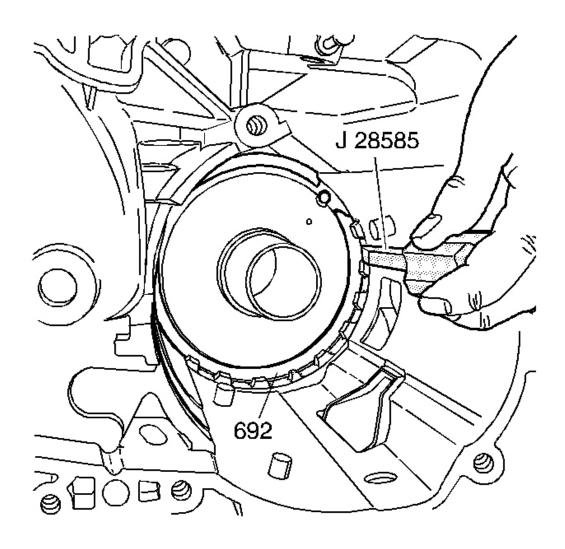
Using J 28585 To Install The Snap Ring Into The Case Courtesy of GENERAL MOTORS CORP.
